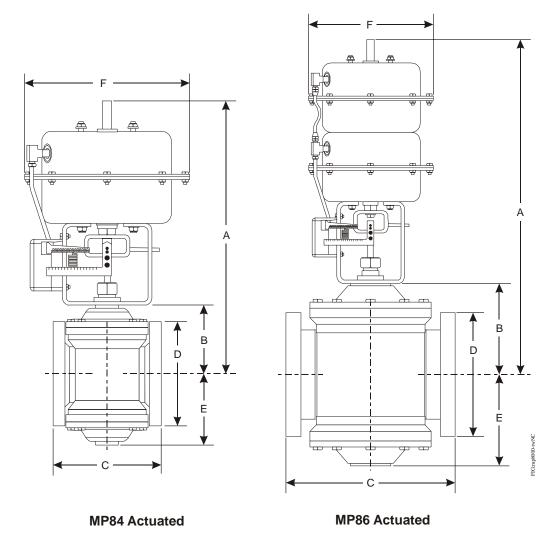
MP8000 Actuated Two-Way N.C. Valve Dimensions (See Table 2.)
